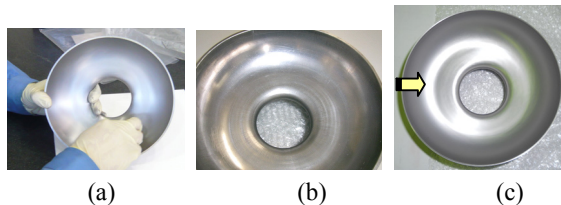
Finishing for inner surface of cell. (a) Present status (Finishing by human hand), (b) Seamless dumbbell before finishing, (c) Seamless dumbbell after finishing by robot
